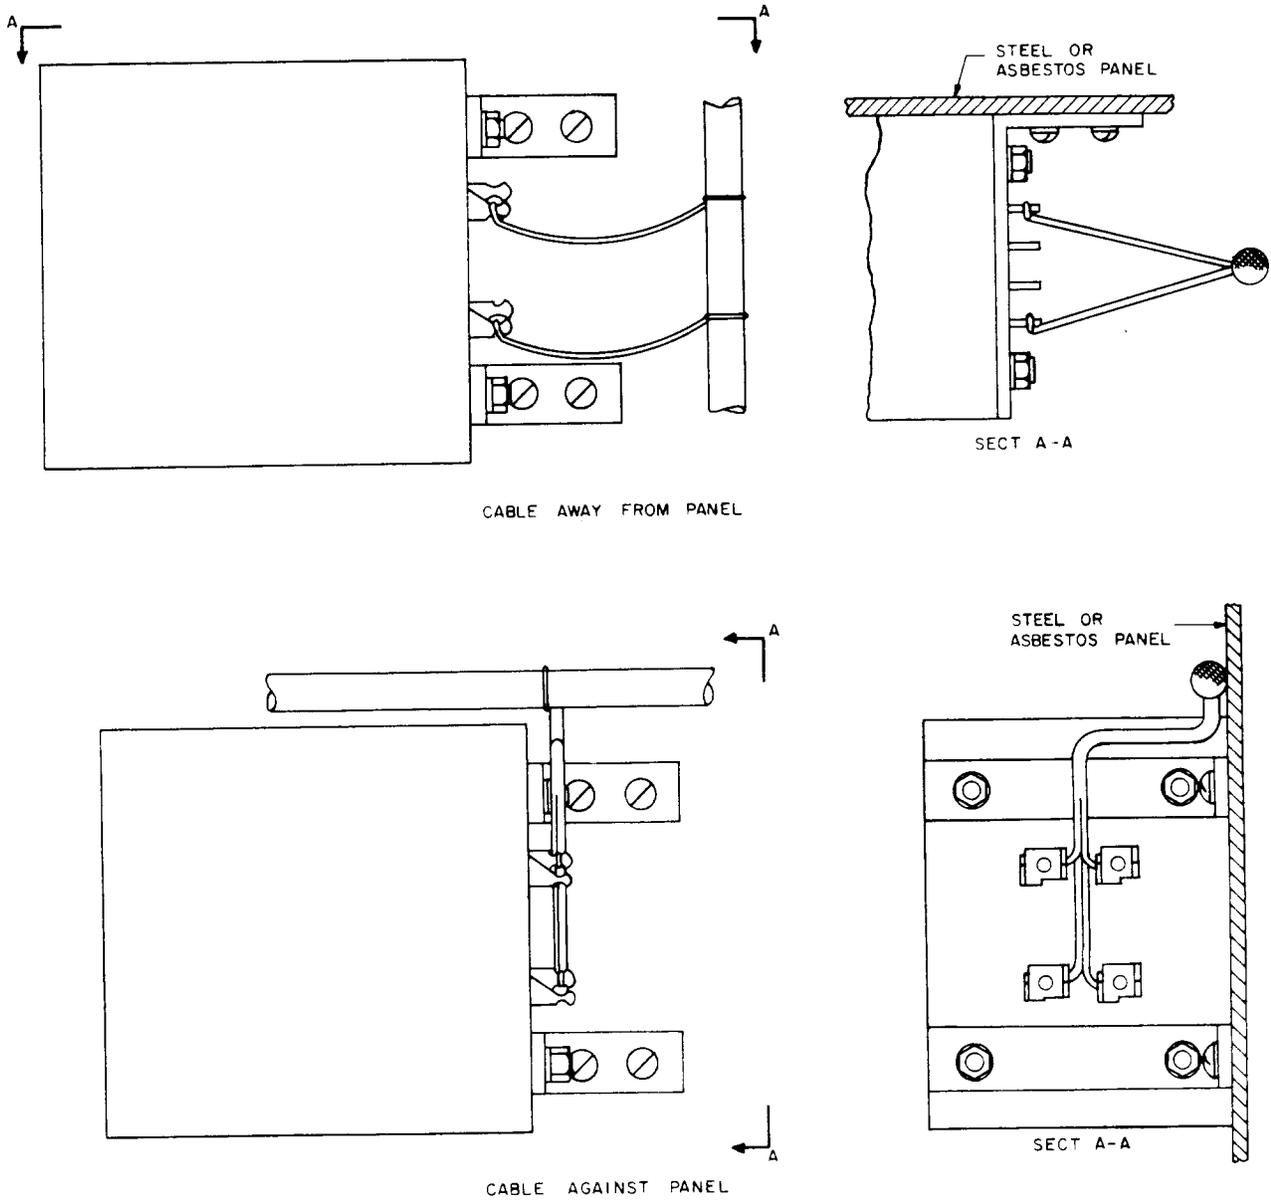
Tone Alternators on Large Ringing Machines
